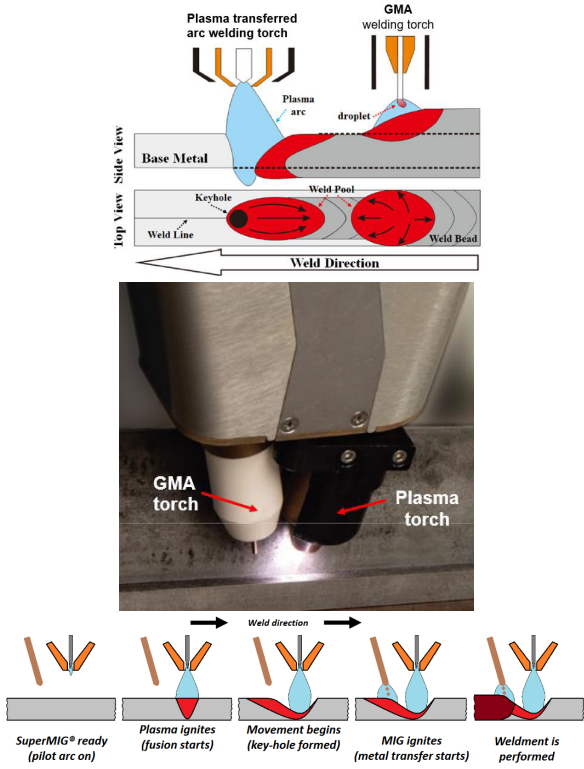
Schematic diagram of the hybrid plasma transferred arc+GMA (PHW) welding and a view of PHW SUPER MIG torch and the PHW welding sequence [19,20]
